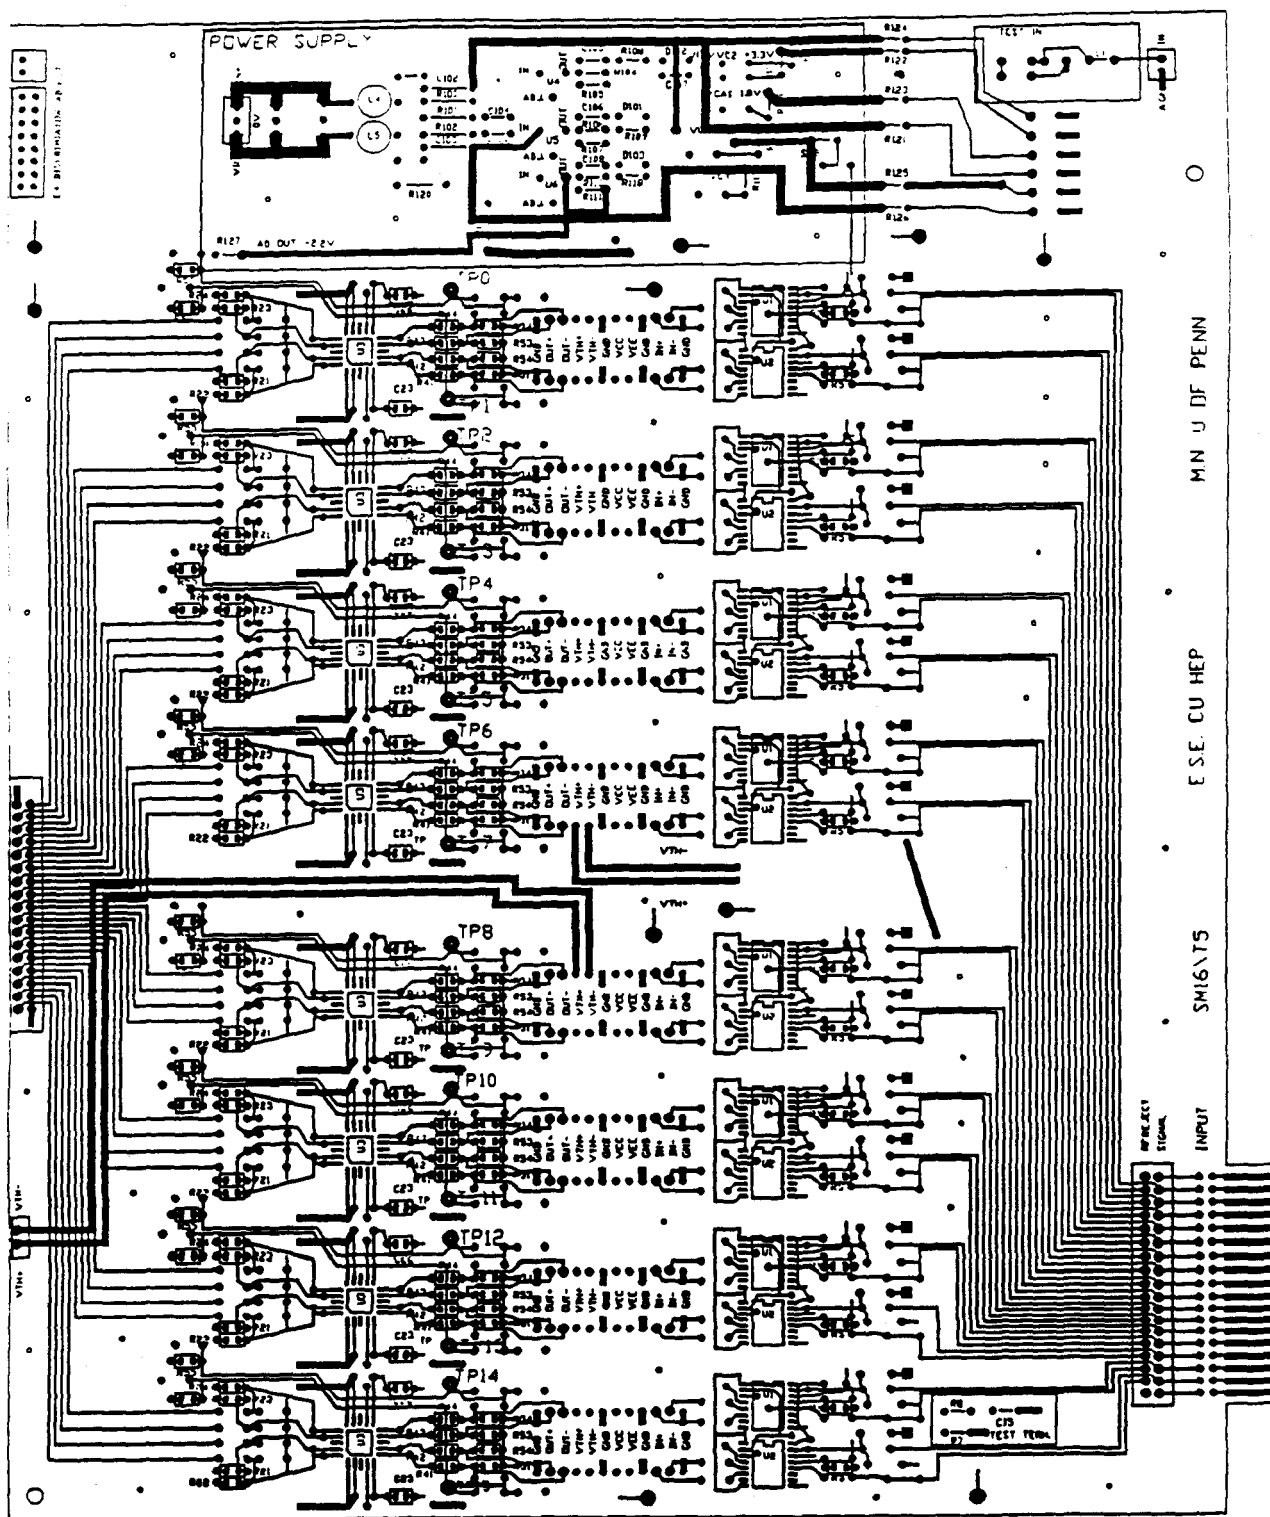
Sixteen channel readout board containing custom amplifier-shaper chip and tail cancellation piggyback board, with a commercial comparator.
